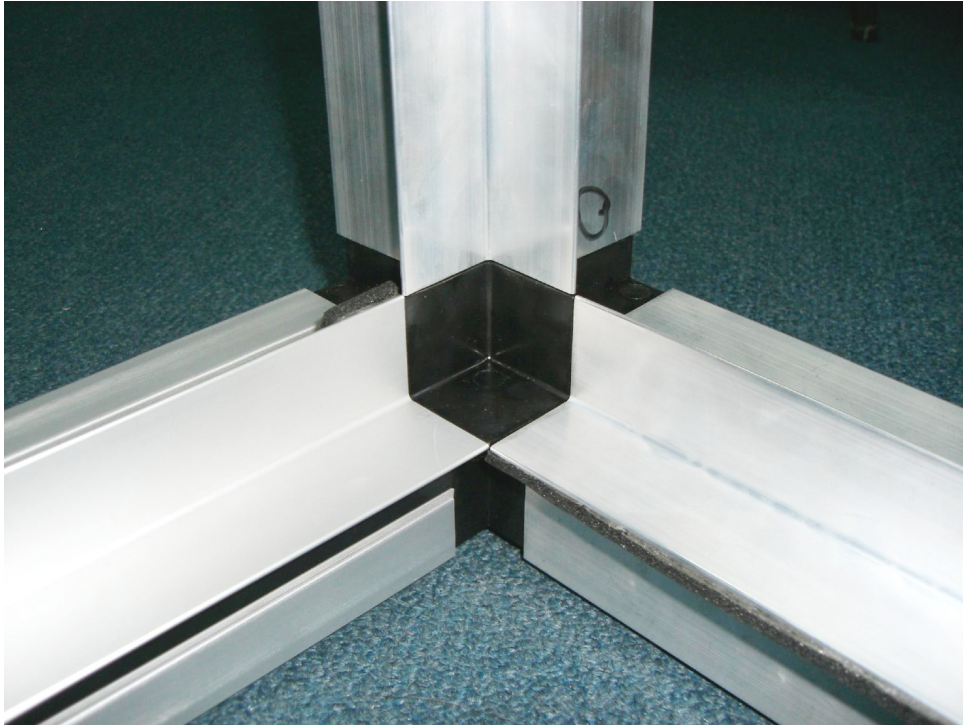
Aluminium pentapost attached to 3-legged injection Nylon corner piece.
